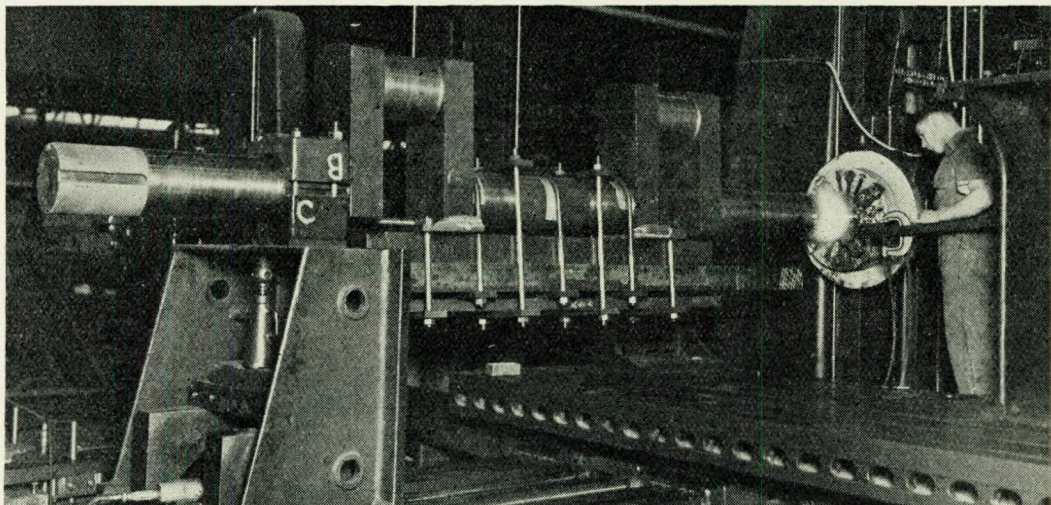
Each end of a press crankshaft being sprayed with steel after damage by failure of keys
